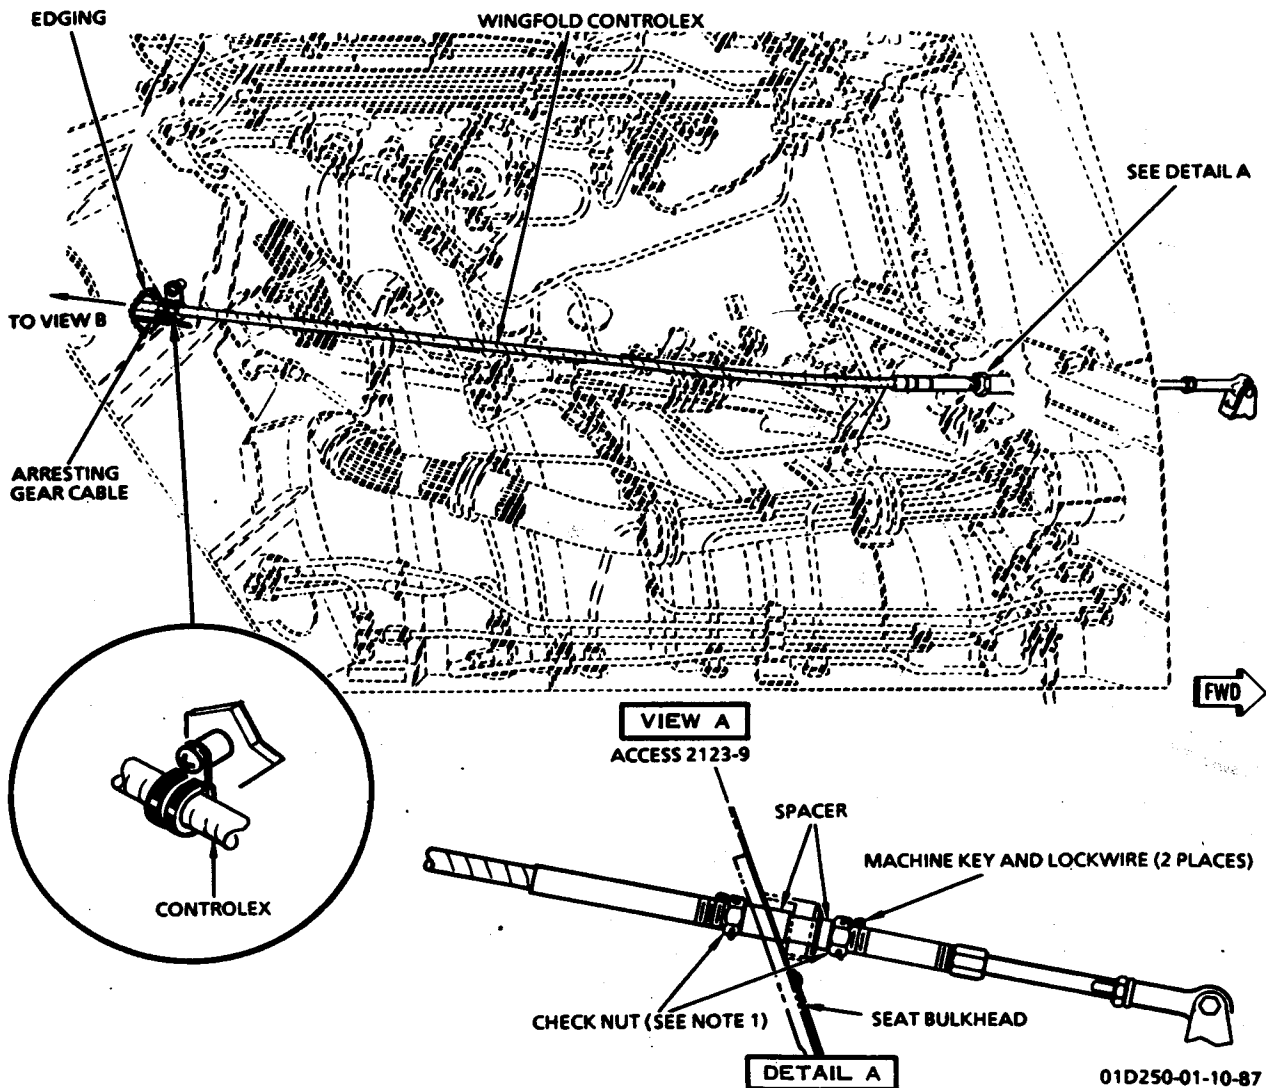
A. Clamping and Routing of Wingfold Push-Pull Control Assembly (Sheet 1 of 7)
